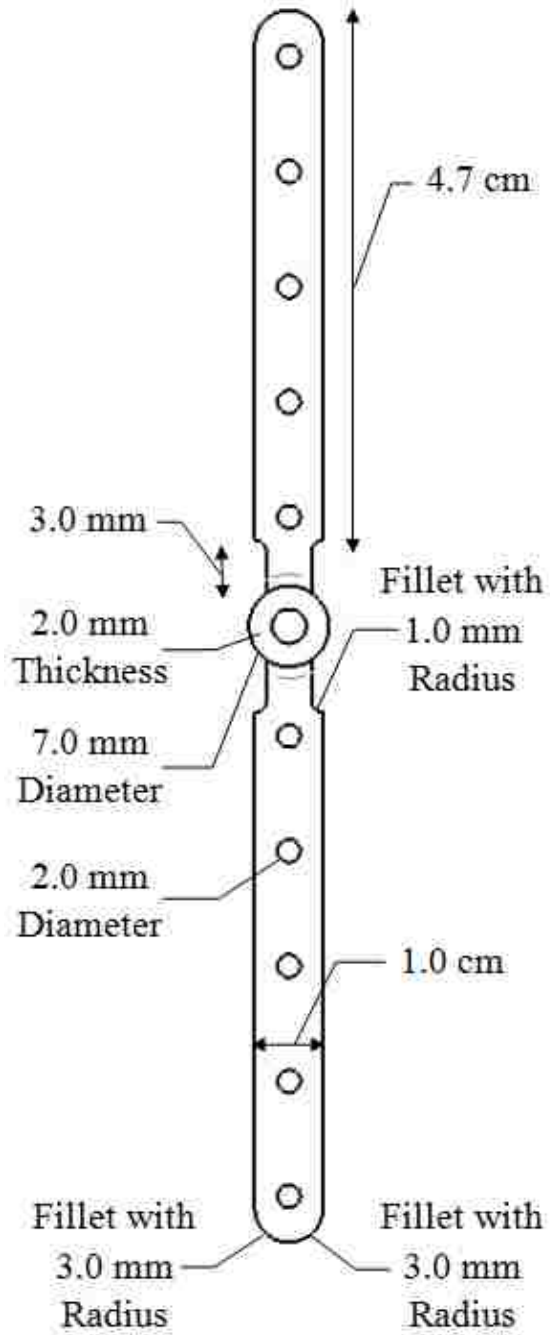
Top View. Bi-Cantilevered Drain/Cantilever System composed of a Circular Drain and two Rectangular-shaped Cantilevers.
